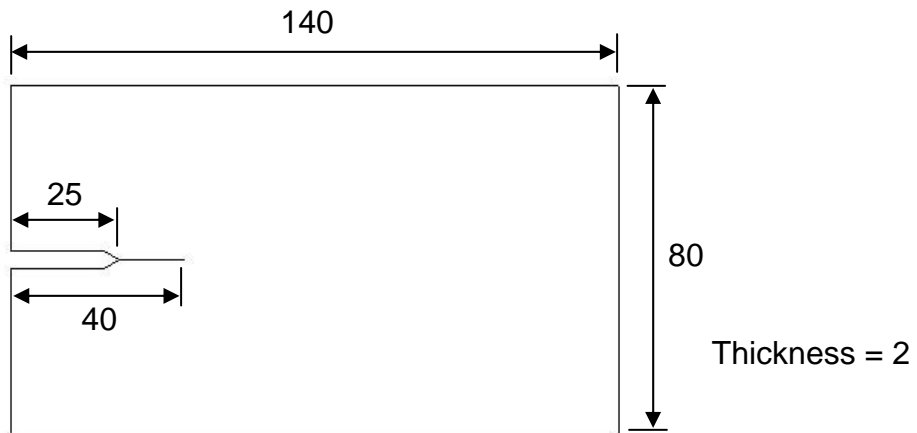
Dimensions of a plate with a single edge crack (Unit: mm)
